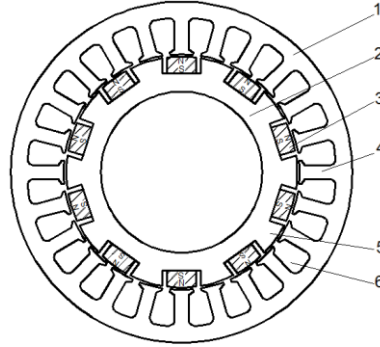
Cross-sectional view of the generator with radially-oriented PMs: 1 – stator, 2 – rotor, 3 – permanent magnet, 4 – stator tooth, 5 – rotor tooth, 6 – stator slot with armature winding.
